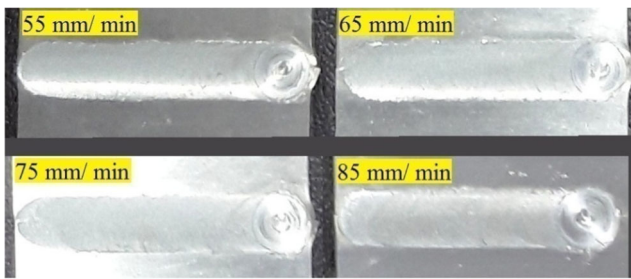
Underwater friction stir welded plates at different welding speeds
